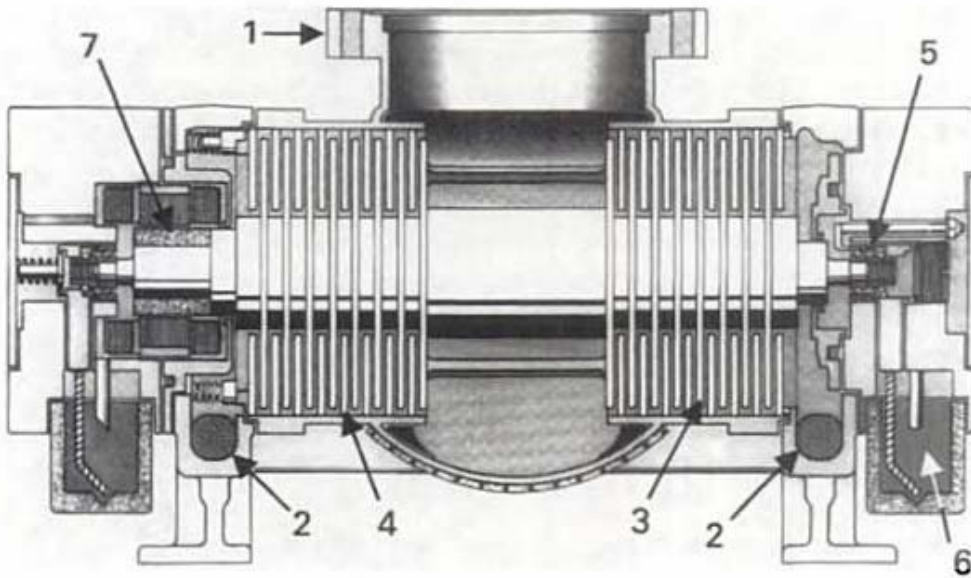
Section view of Pfeiffer TPU-200 turbomolecular pump: (1) inlet, (2) outlet, (3) rotor disk, (4) stator disk, (5) bearing, (6) oil reservoir, (7) motor. Reprinted with permission from A. Pfeiffer Vakuumtechnik, GmbH, Wetzlar, Germany.
